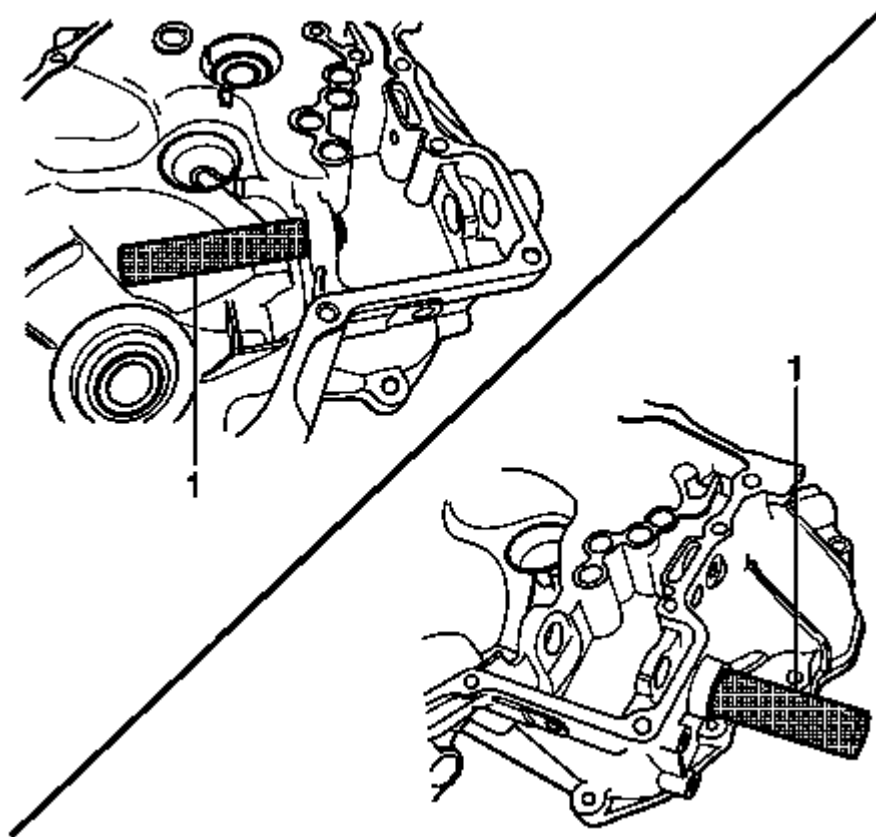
DT-49082 Needle Bearing Remover/Installer
